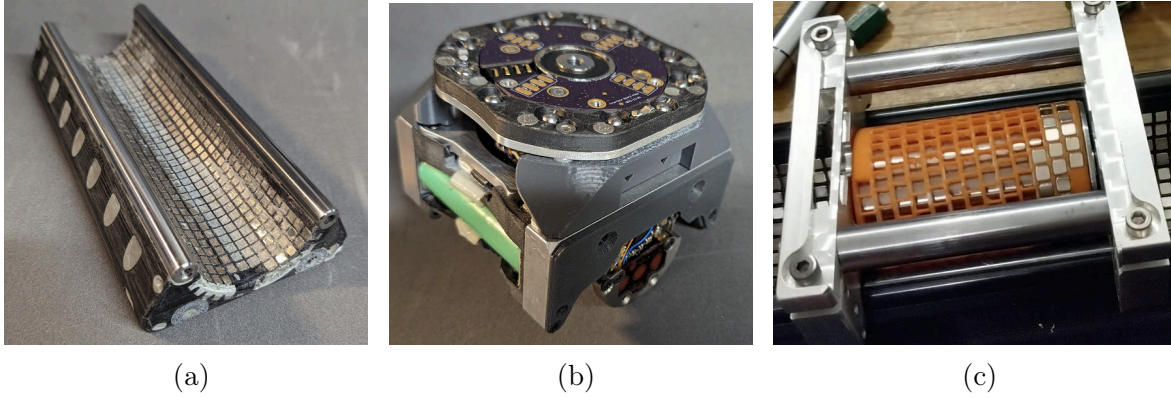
These three images show the final track (a) and cart (b-c) as fabricated. The manufacturing process for these prototypes was quite involved, as the 3D printed parts deformed slightly during assembly. In order to achieve the dimensional accuracy to successfully transition between tracks, the tracks had to be filled with machinable epoxy, and have various mechanical features including the rail positions carefully re-machined.
